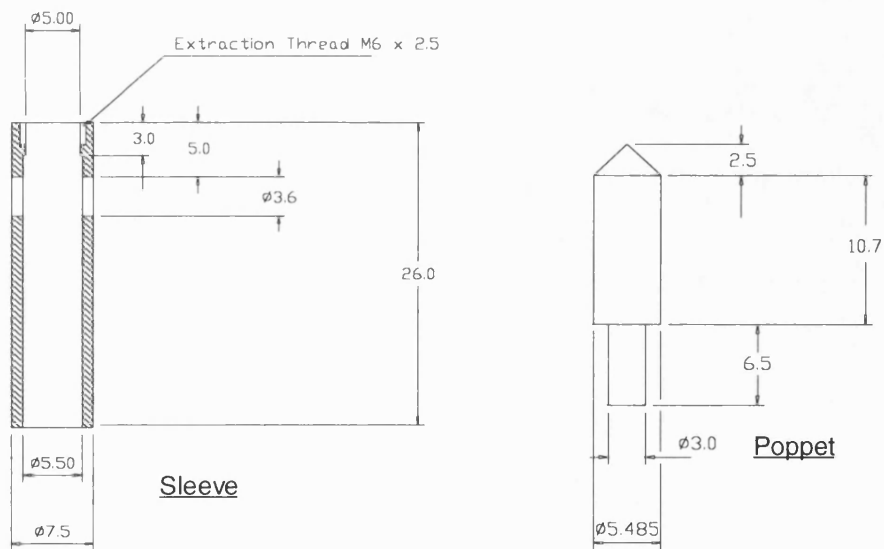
Details of the poppet and sleeves design used for the 1st HDCV working prototype
